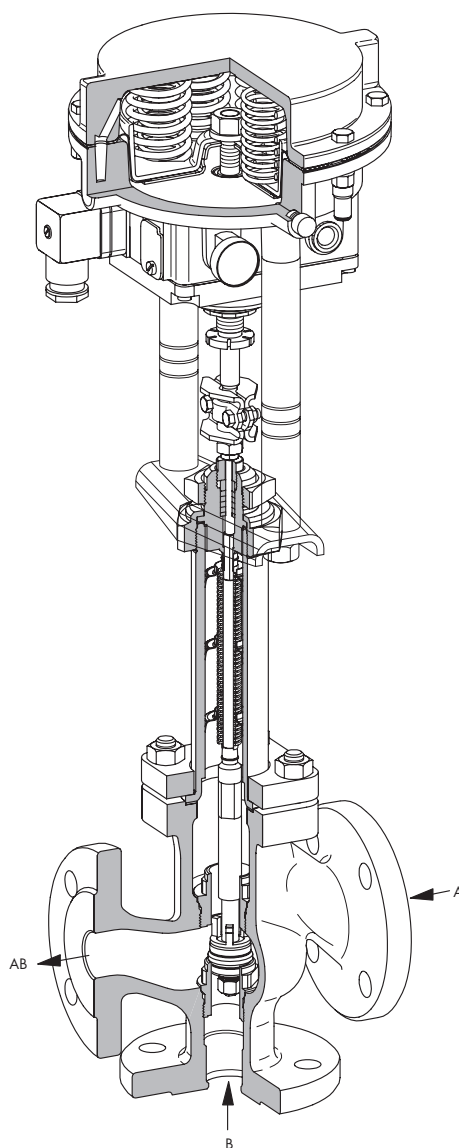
Type 3535-IP Valve (mixing) for Heat Transfer Oil, pneumatic actuator with integrated electropneumatic positioner
